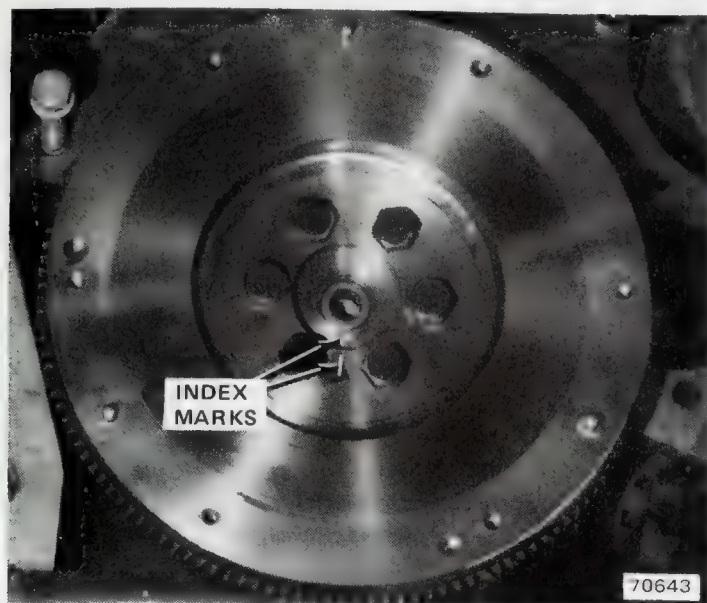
A-20 Crankshaft-To-Flywheel Index Marks
